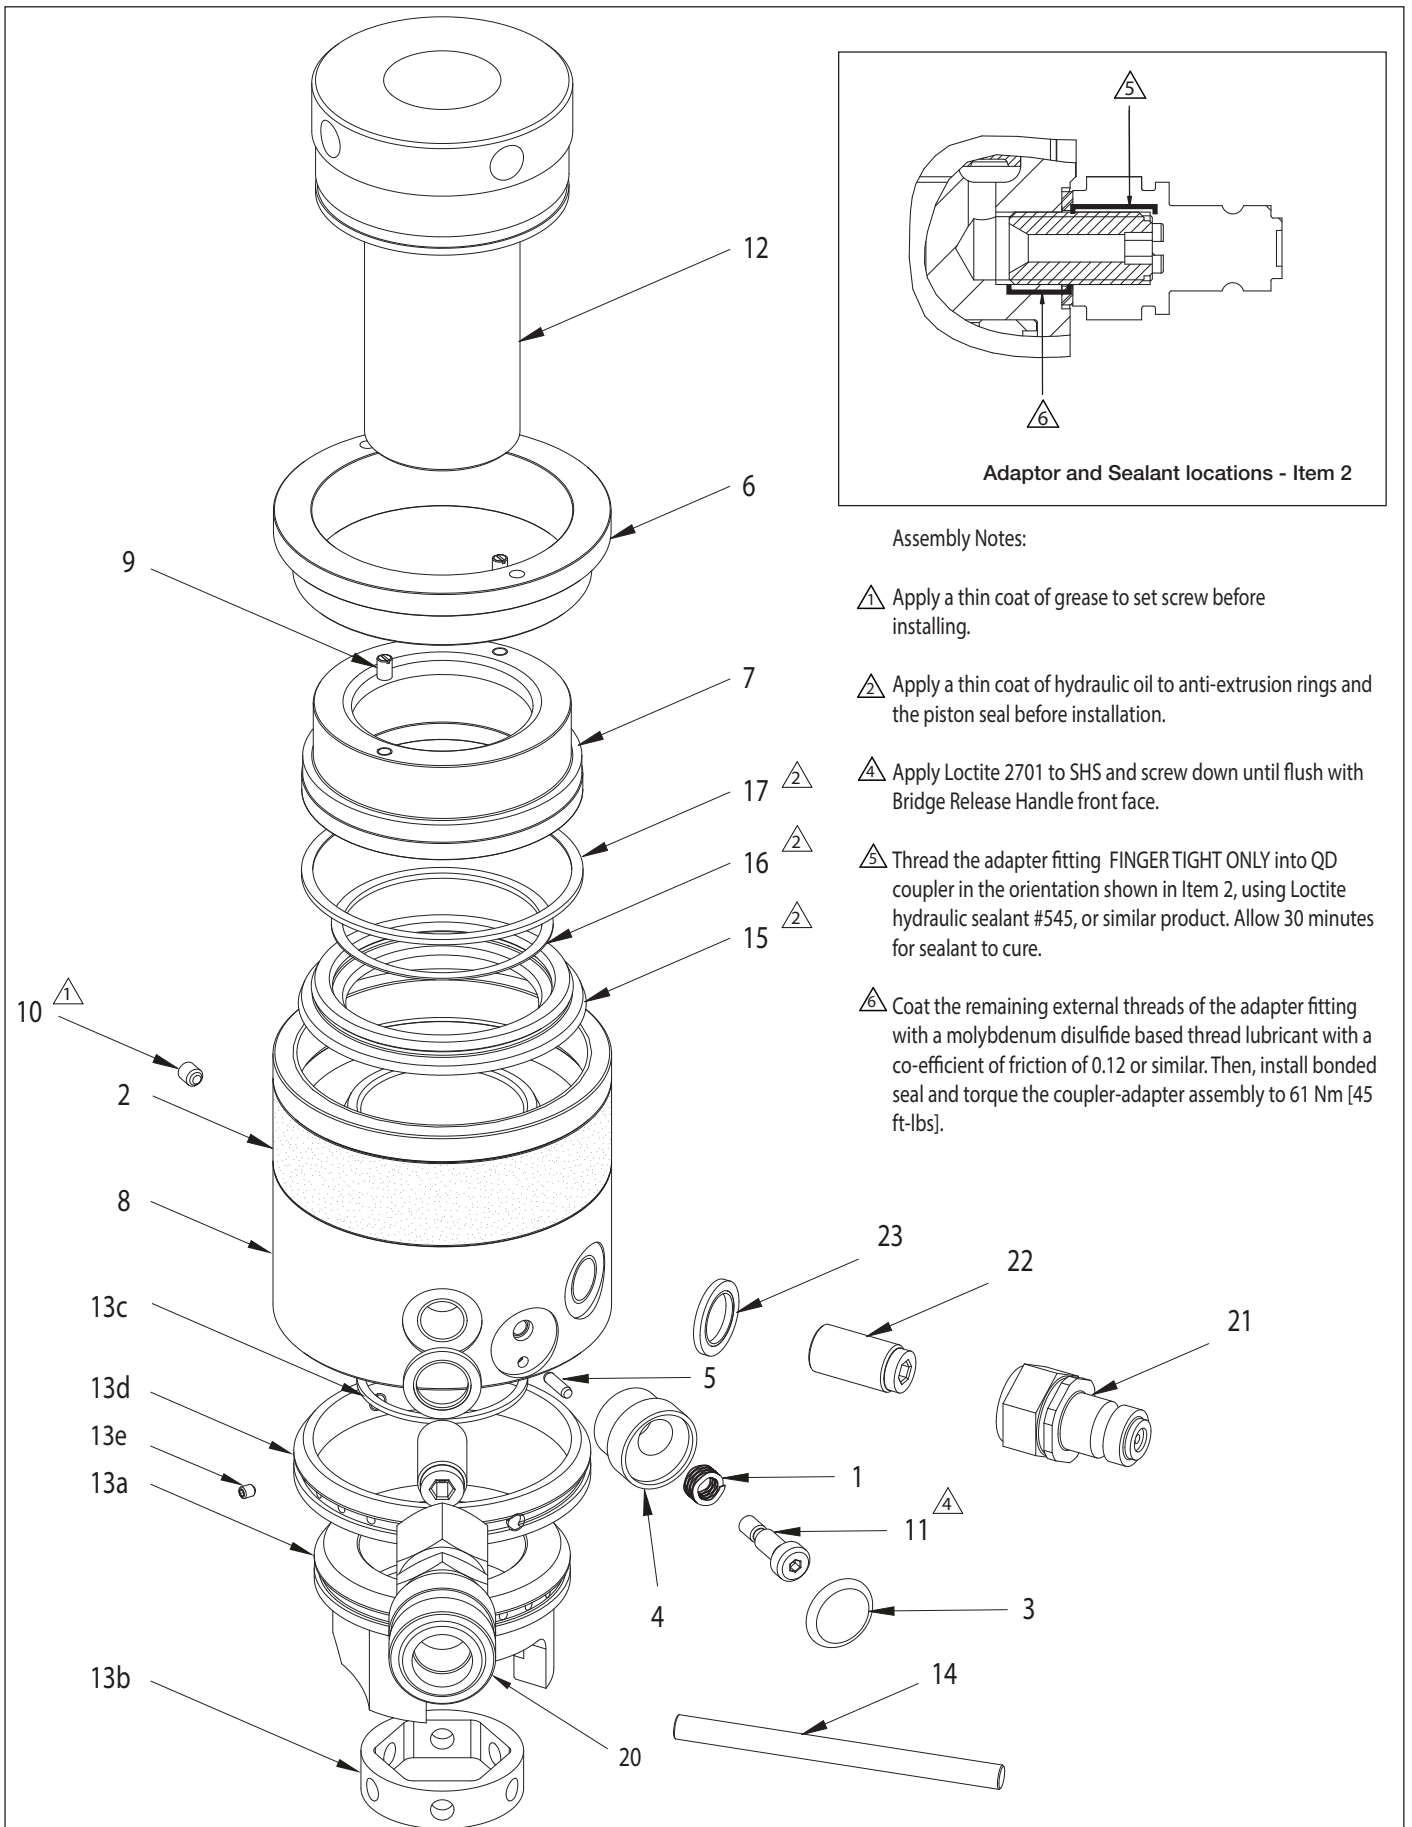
, Exploded View, HydraMax® Series Hydraulic Tensioner (Models HM04, HM05)
